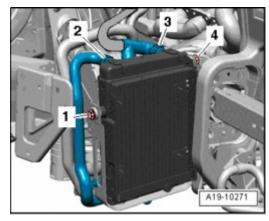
Removing Bolts, Coolant Hoses, Right Auxiliary Cooler & Disengaging Auxiliary Cooler Downward From Bracket
